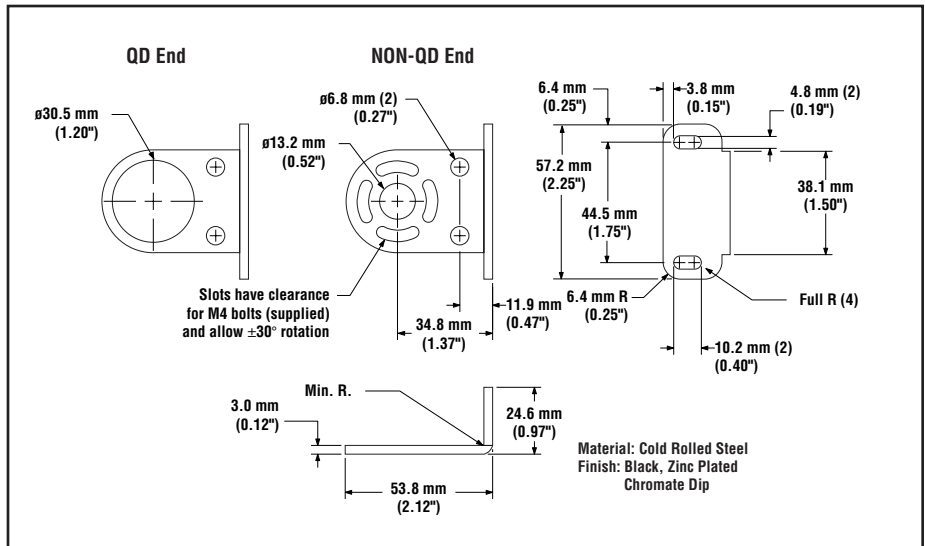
A-GAGE MINI-ARRAY emitter and receiver mounting bracket dimensions
